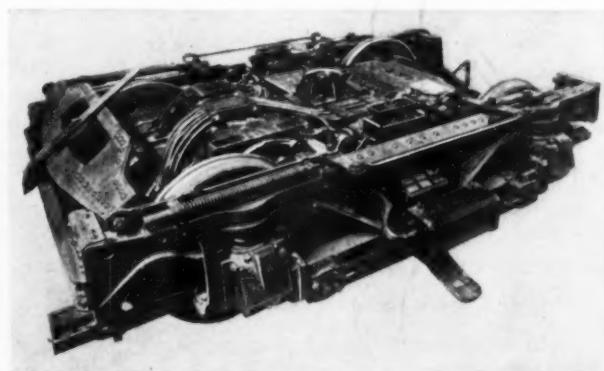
ONE OF THE MOTOR TRUCKS COMPLETELY EQUIPPED
